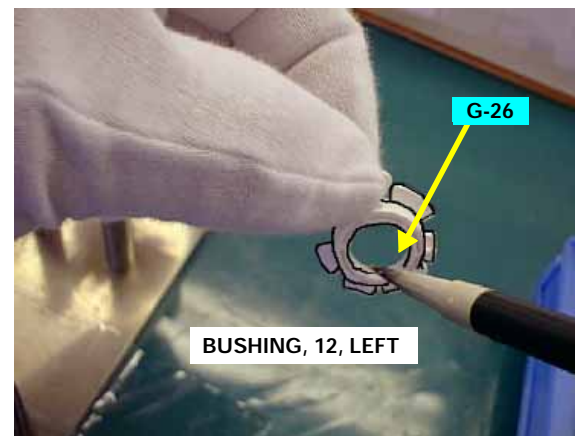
#6 Inside the PF Roller Bushing - Left
